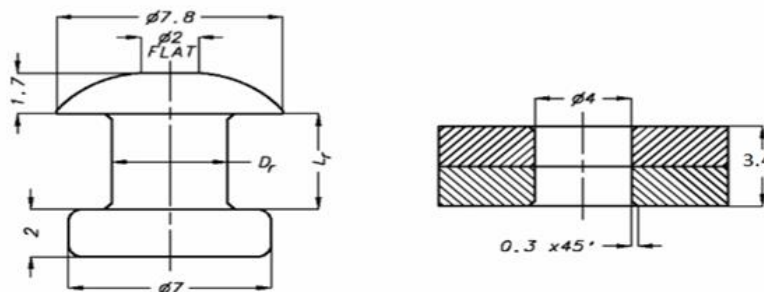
Geometries of deformed rivet and rivet hole on the plates
